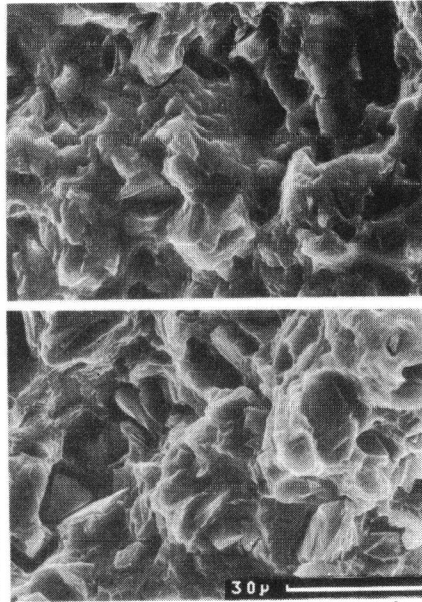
Fatigue fracture surface at (a) $\Delta K \sim 10 \text{ MPa}\sqrt{\text{m}}$ and (b) monotonic fracture.
